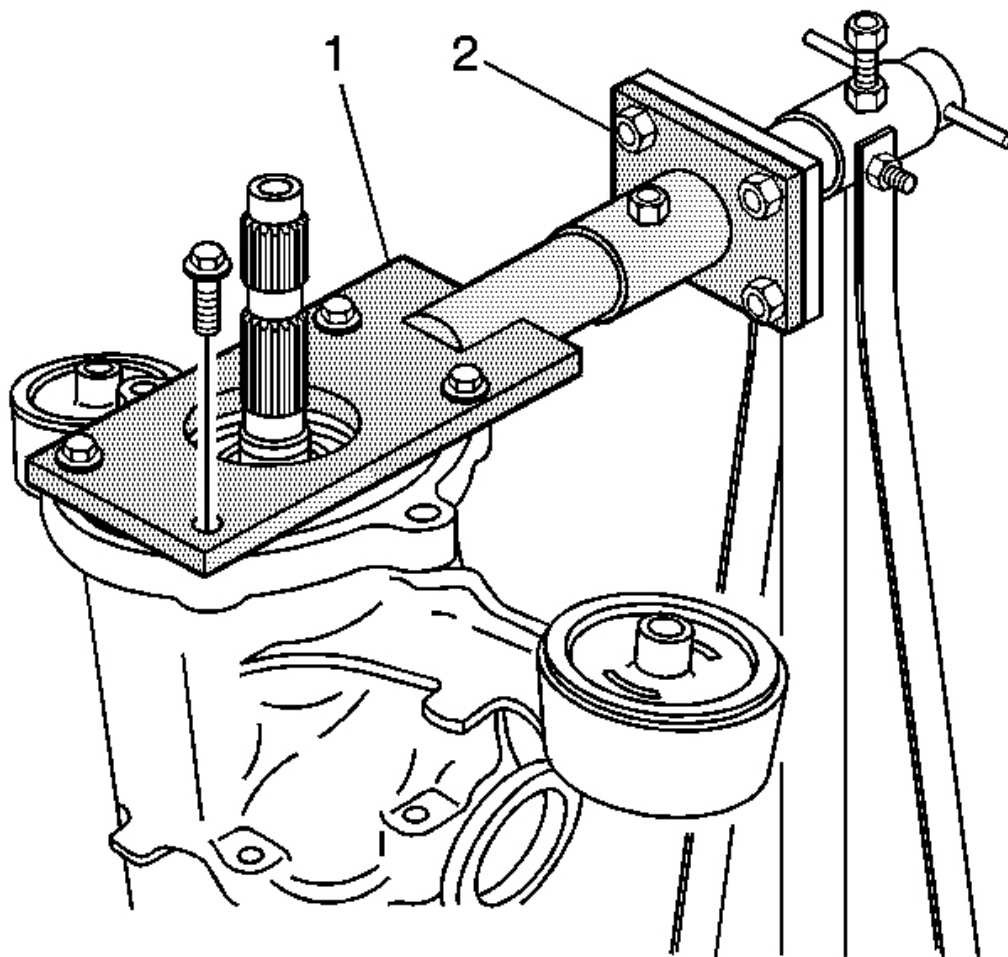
Installing Differential Housing On J44869 Using 4 Clutch Cover Bolts
